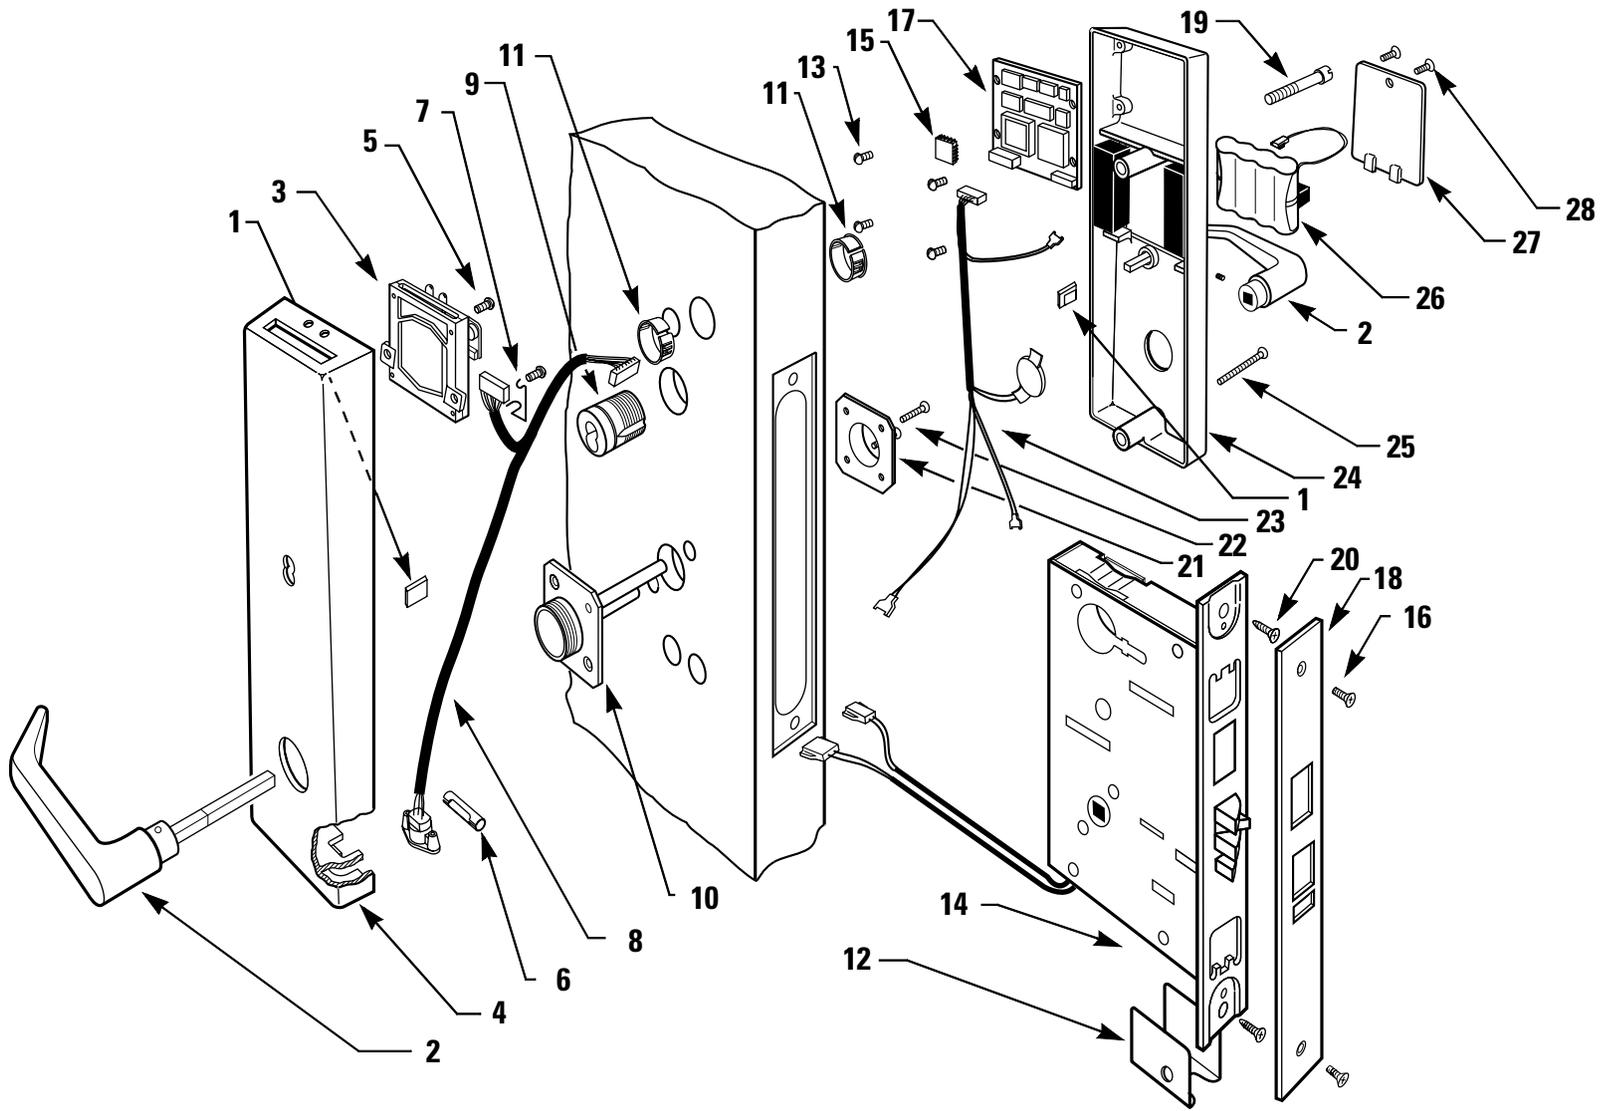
34/35HV magnetic stripe trim exploded diagram
